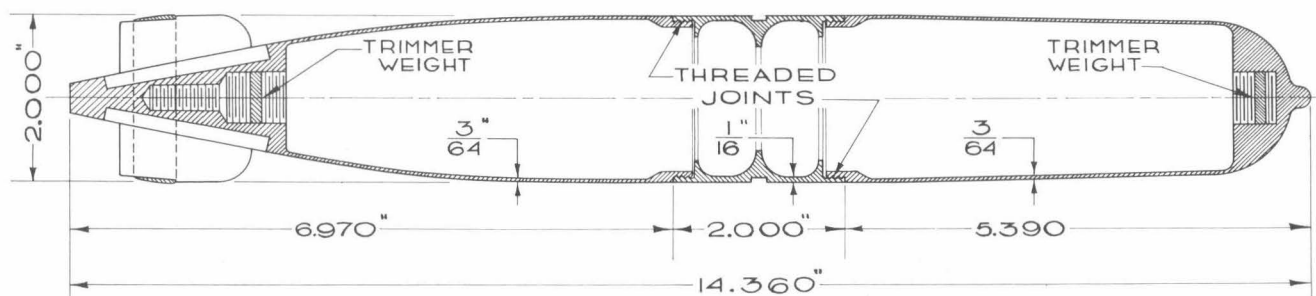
Sectional view of the standard (Head F) Mk 13-6 torpedo model
